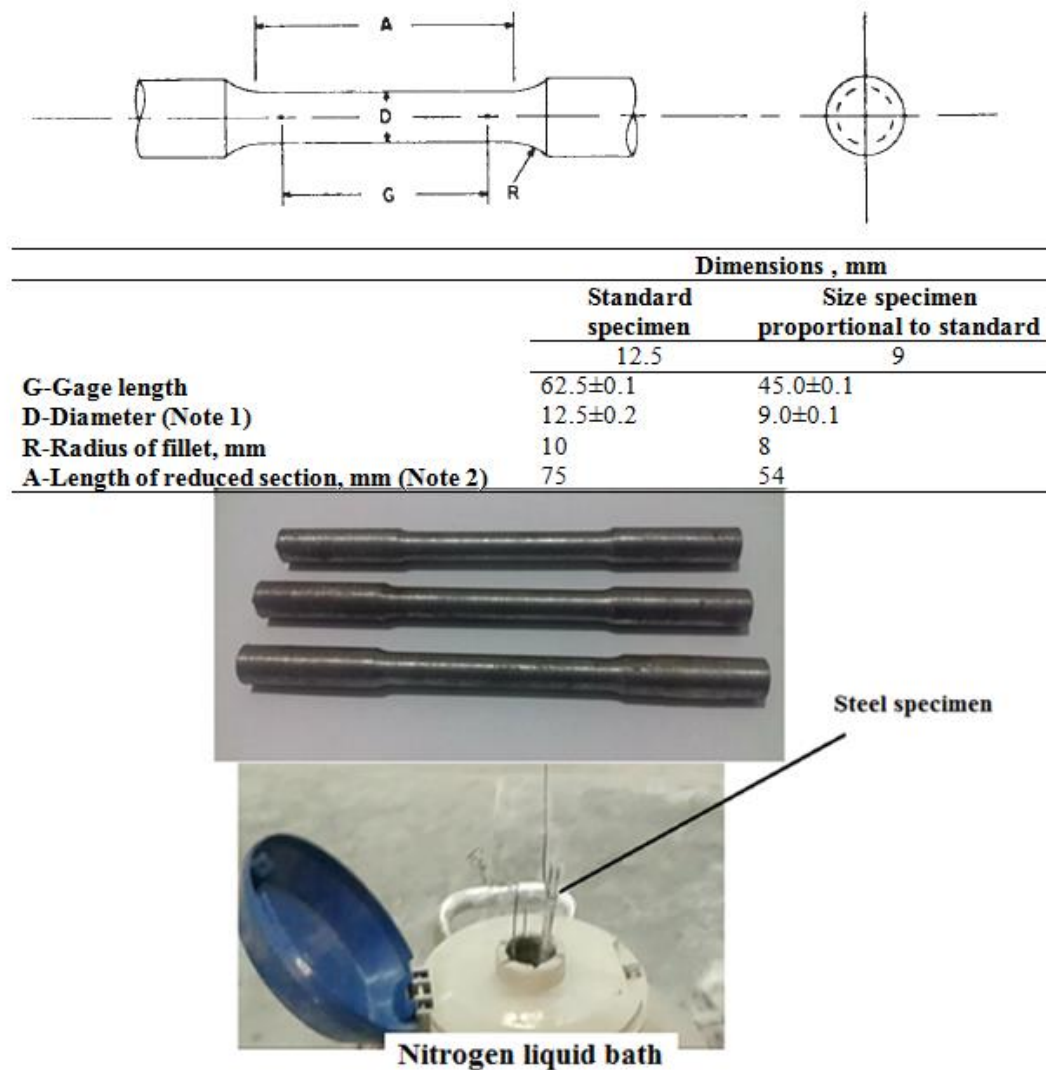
Measurements and tolerances of tensile stress test specimens, machined according to standard (Designation: E 8M – 04)
